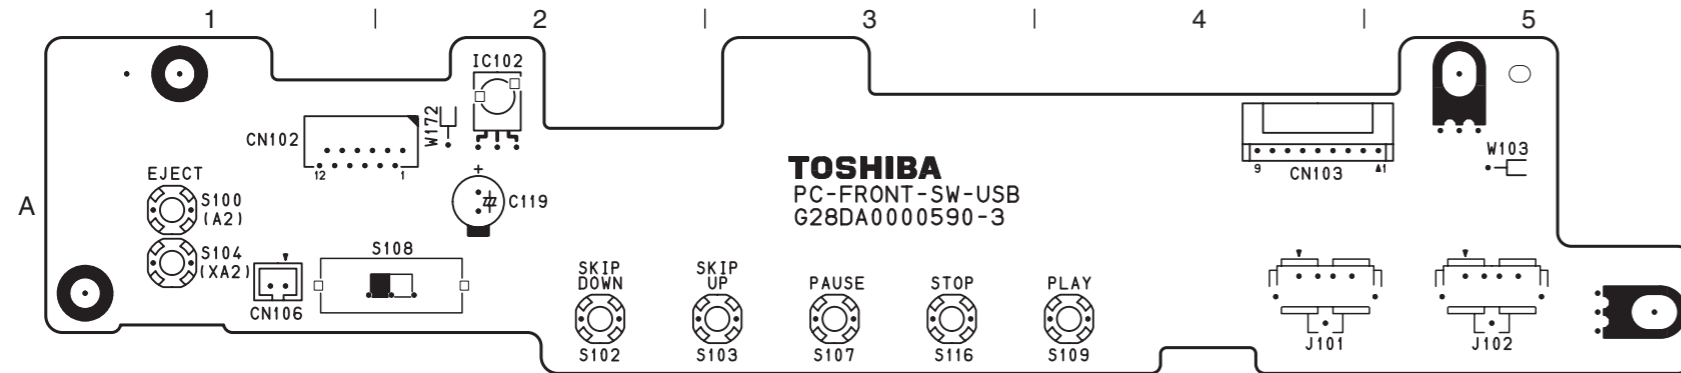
Front Switch/USB PC Board (Top side)
